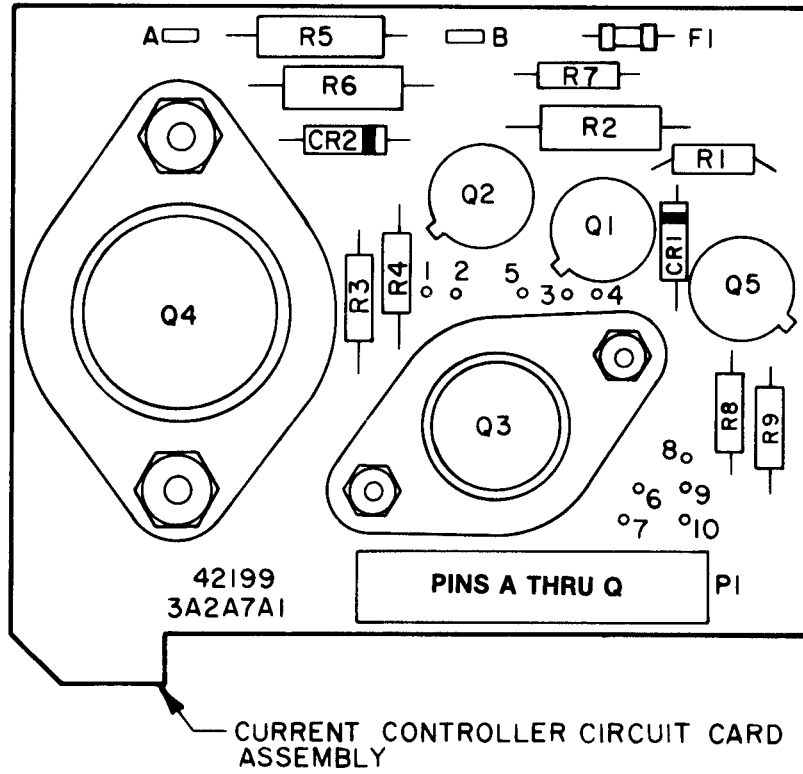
MOTOR DRIVE AND CURRENT CONTROL BOARD ASSEMBLY.
